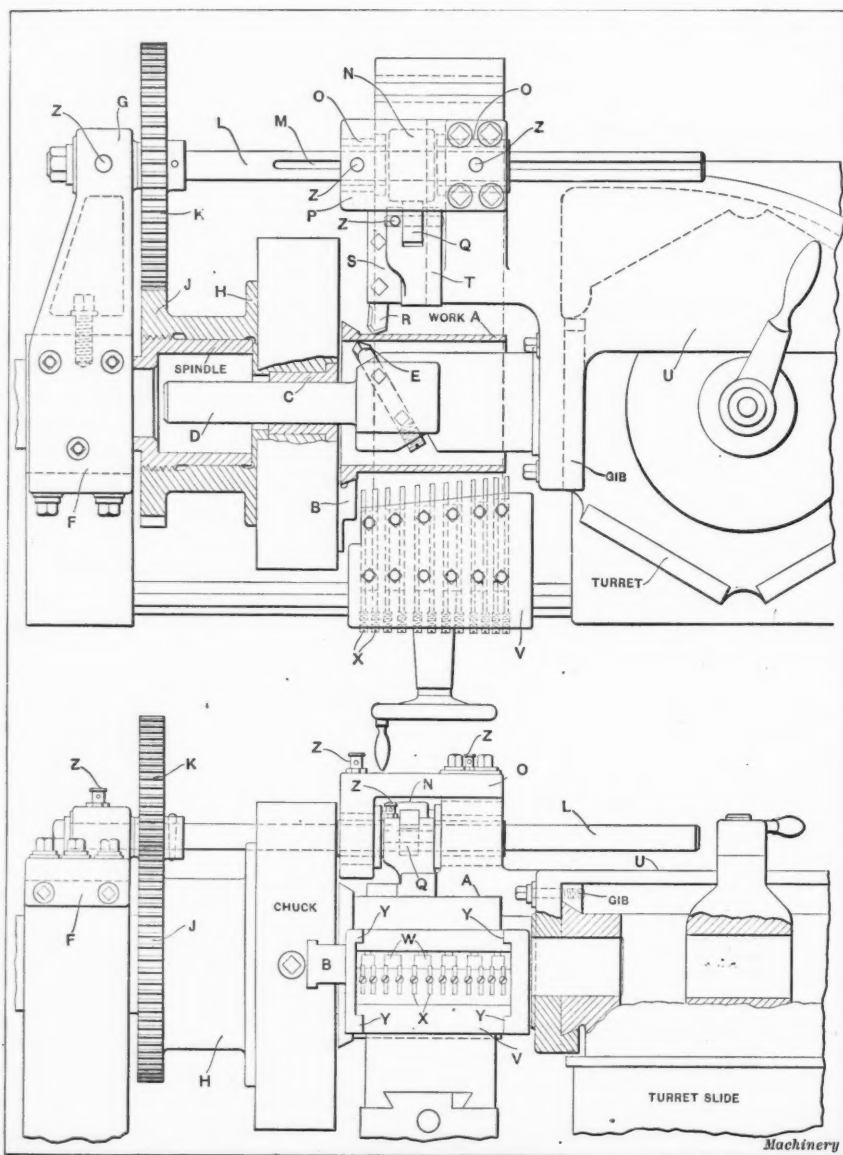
Eccentric Piston Ring Turning and Boring Attachment
